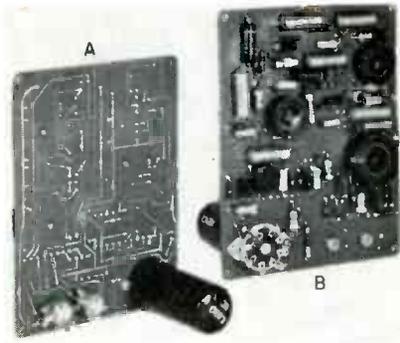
Top & bottom views of printed circuit frequency standard show component arrangement
